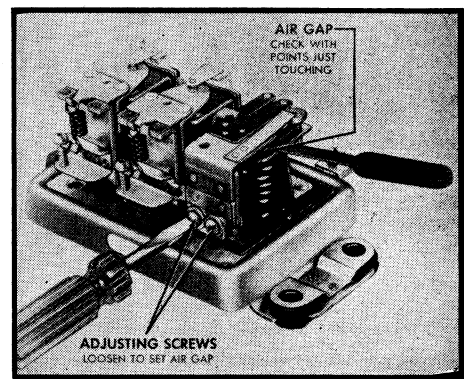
Checking and adjusting Delco-Remy circuit breaker armature air gap
